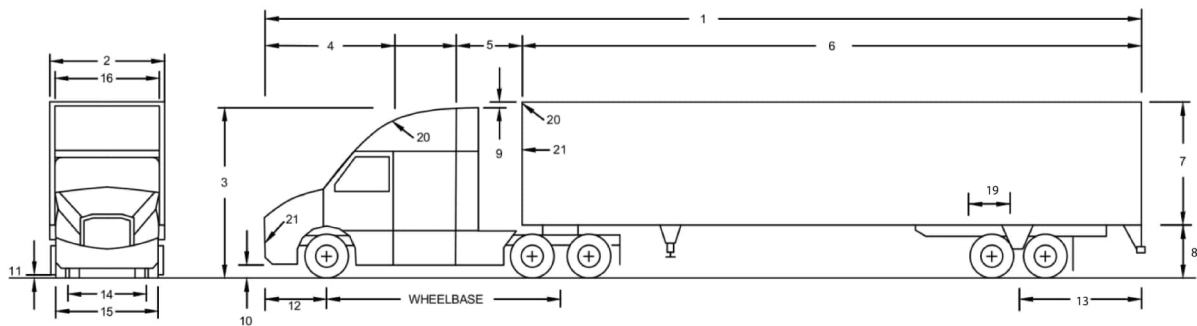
NRC 30%-scale tractor-trailer model - locations of relevant dimensions (SAE J1252). Dimensions are listed in Table 2.4.
